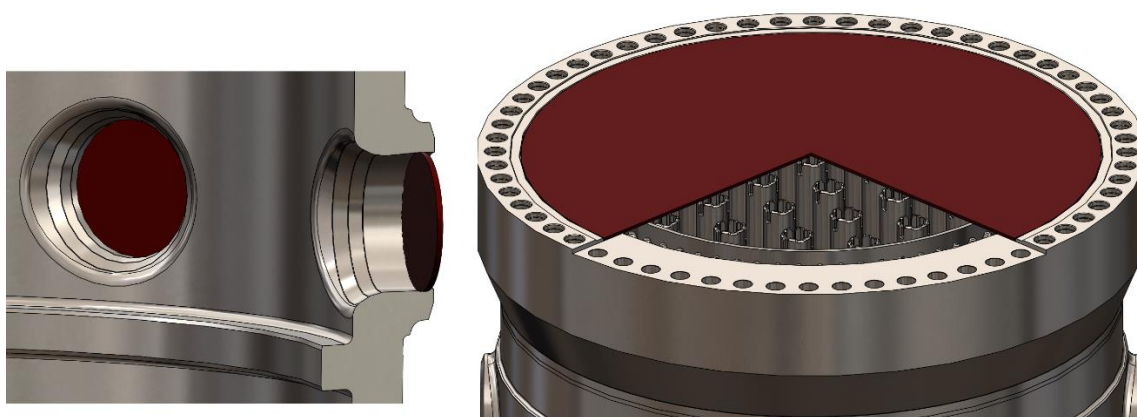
Stainless steel sealing plates (red), the nozzle plates on left and the top plate on right.
